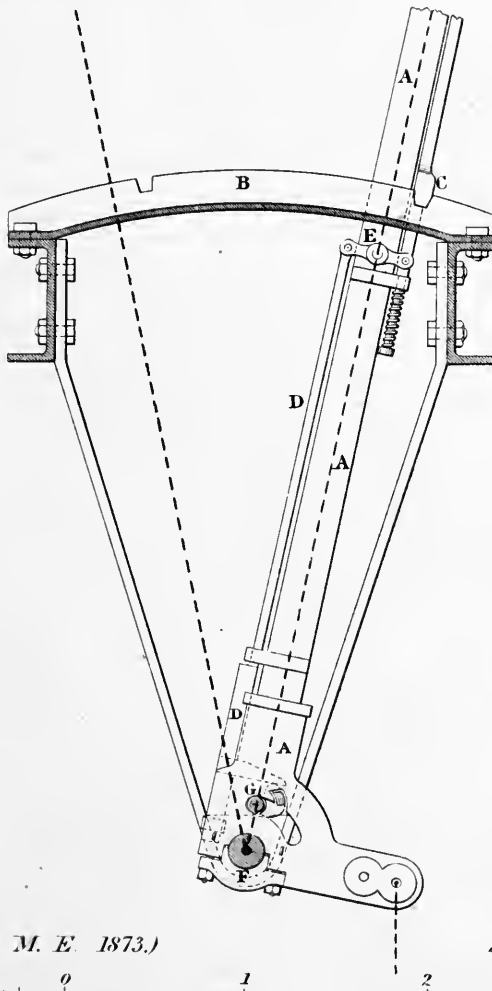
Transverse Section of Nine-Lever Locking Machine.
